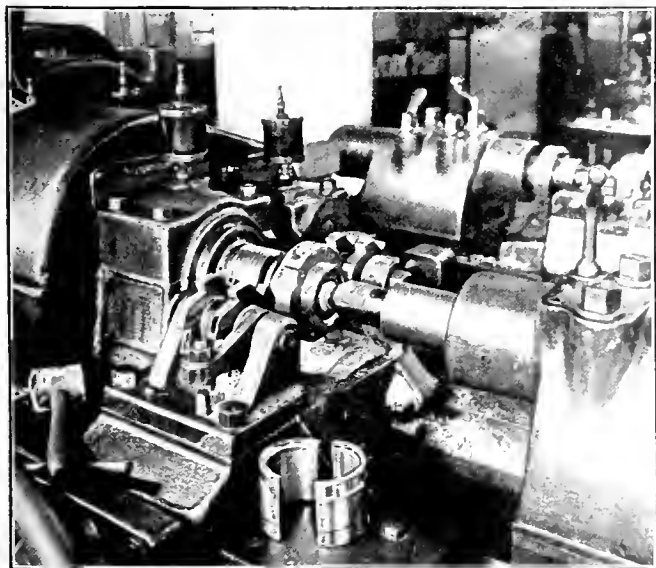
METHOD OF CUTTING GROOVES FOR FORKED-END ROD—OPERATION 17
